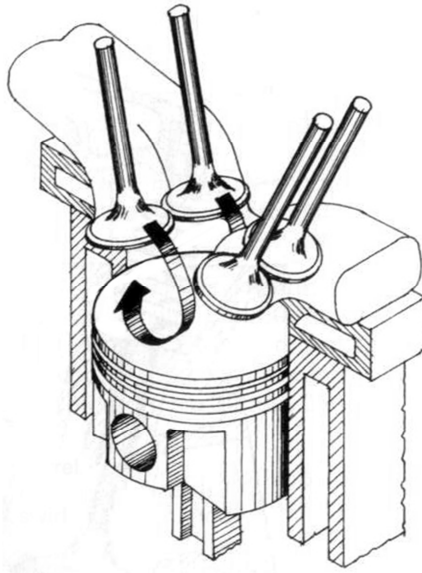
Cutaway view demonstrating typical relation of inlet and exhaust valves to the combustion chamber, [3]
